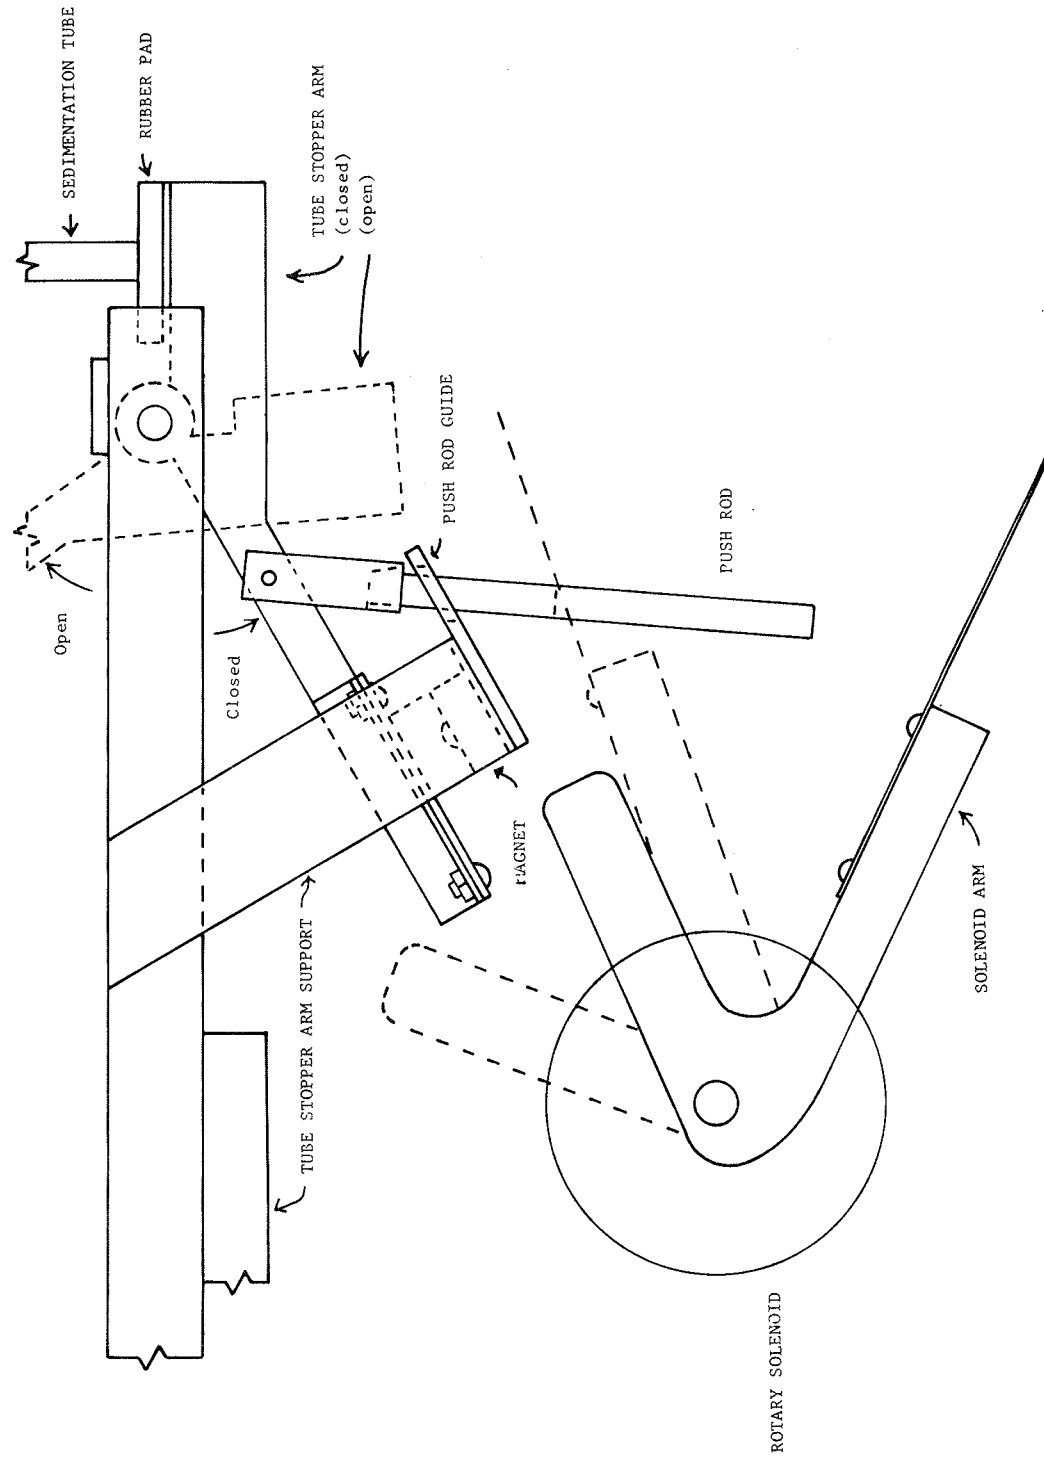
SEDIMENTATION TUBE STOPPER AND DUMPING MECHANISM
